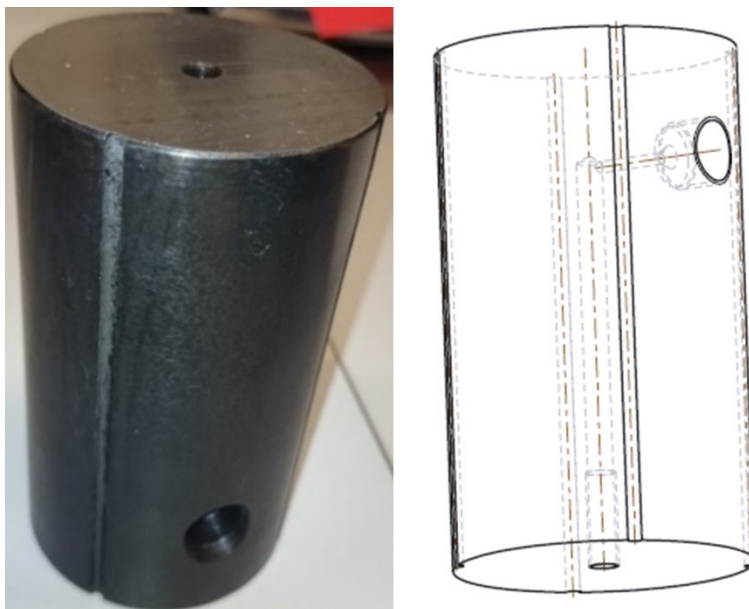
Axial platen with internal conduit to transfer fluid pressure into the specimen
